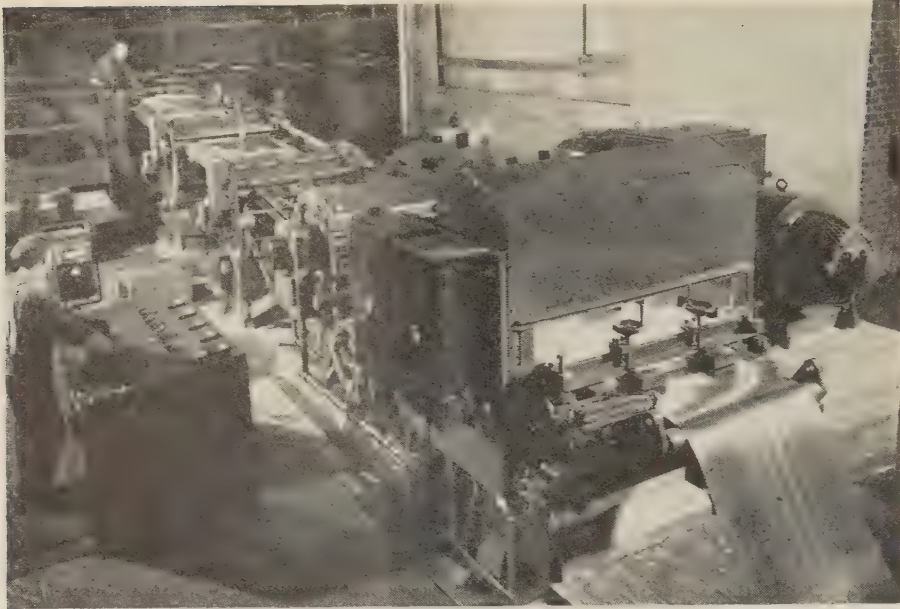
PINHOLE DETECTOR IN A STEEL-STRIP SHEARING LINE
